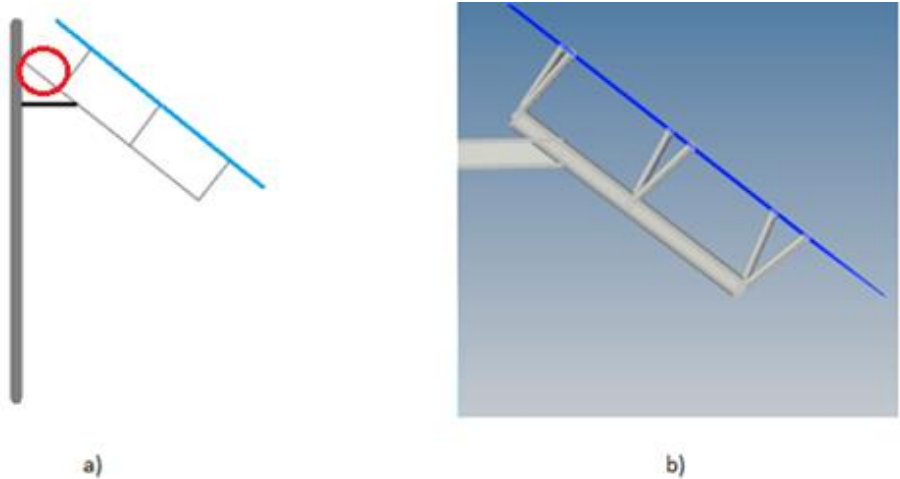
Final lay-out (side view): a) with extension (drawing), b) without extension (virtual prototype)
